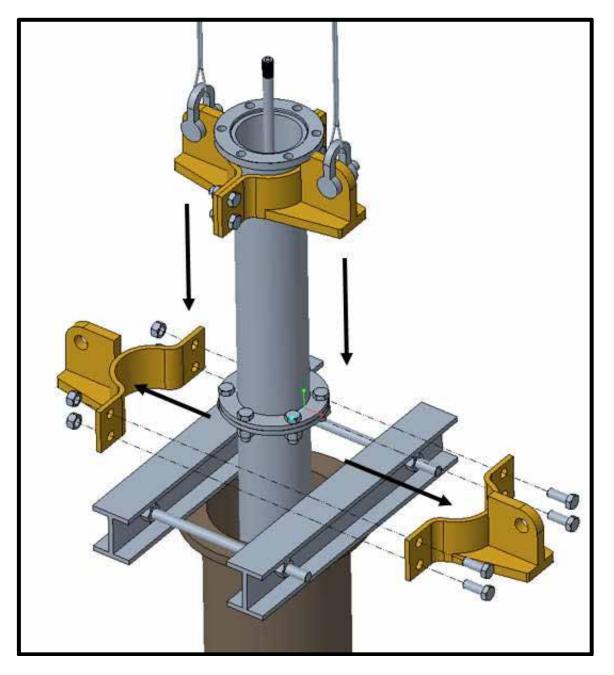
Repeat processes per Sections 3-1 thru 3-1-5 until all Columns (5) have been assembled and lowered into the Caisson (11) or pit opening.
